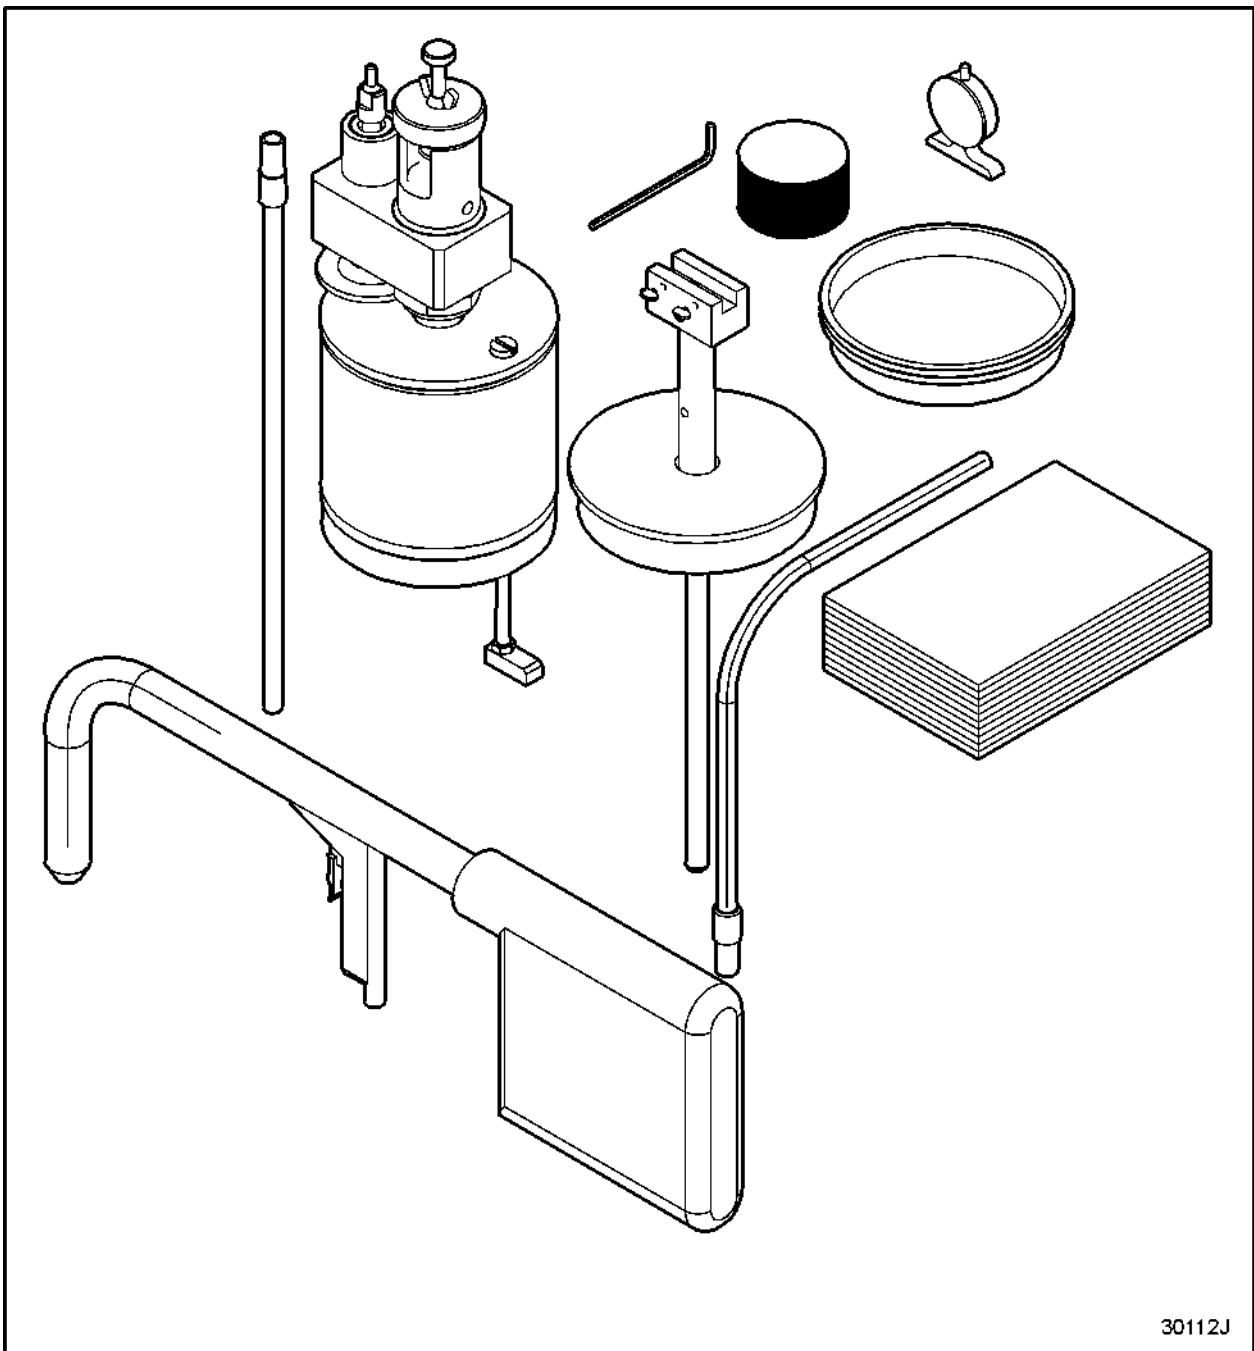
Liner Removal, Universal Screw Type,PT-6410-B
